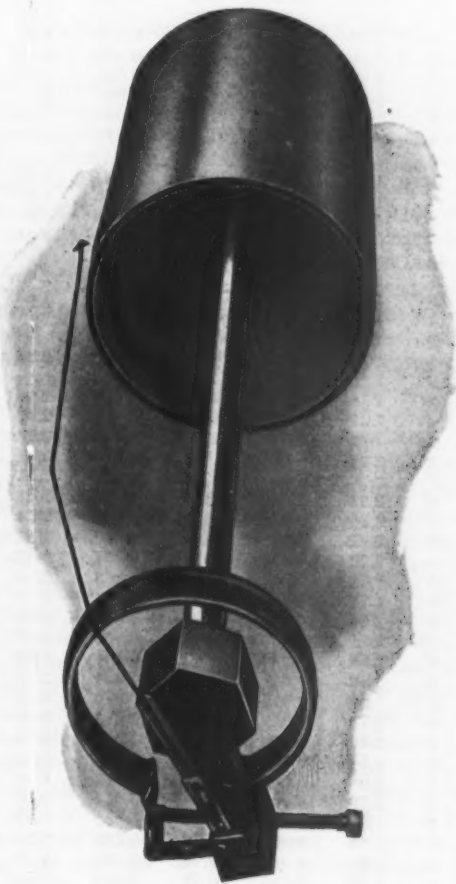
The Valve, Valve Stem and Spring.—The Only Moving Parts in the Meter.
